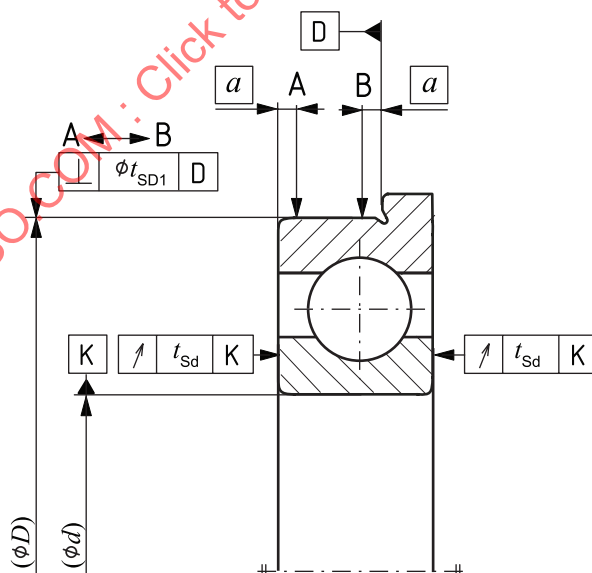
Geometrical tolerances for assembled bearing with tapered bore — Single-row angular contact ball bearing and tapered roller bearing
